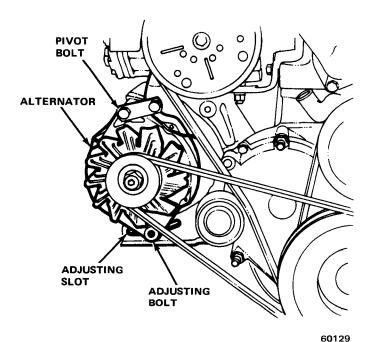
Alternator Adjustment—Six-Cylinder
